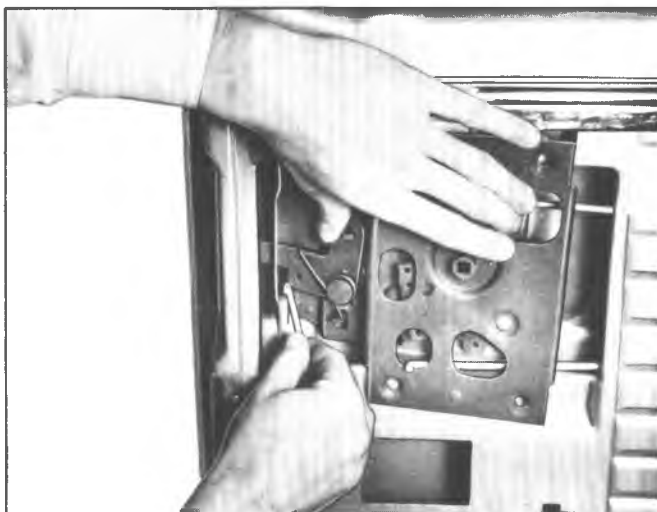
D-122—Disconnecting Lower Latch Rod from Latch
